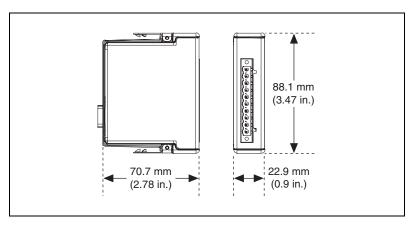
C Series I/O Module, Front and Side View with Dimensions
